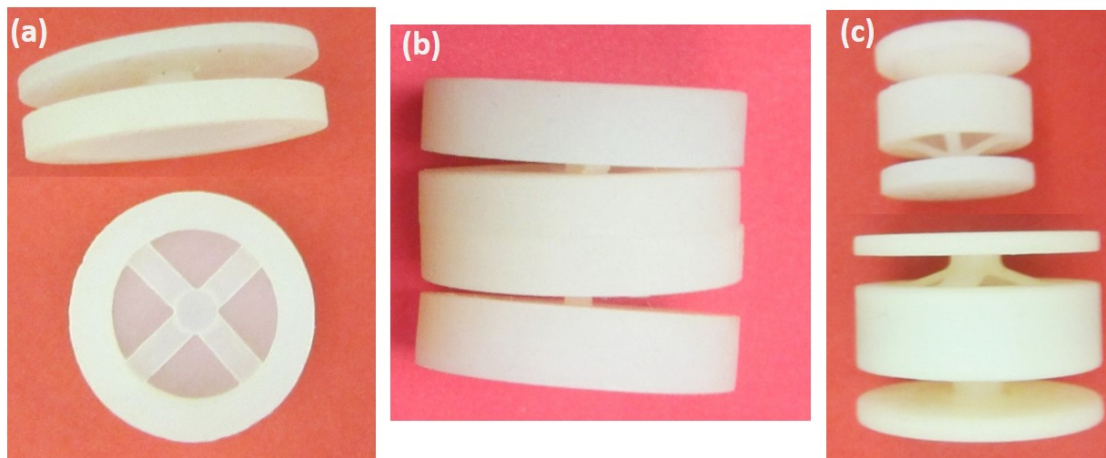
Example test cylindrical inclusions with pre-curved beam elements printed either (a) as two separate halves and (b) then assembled as one inclusions with epoxy, or (c) as one piece with soluble support material
